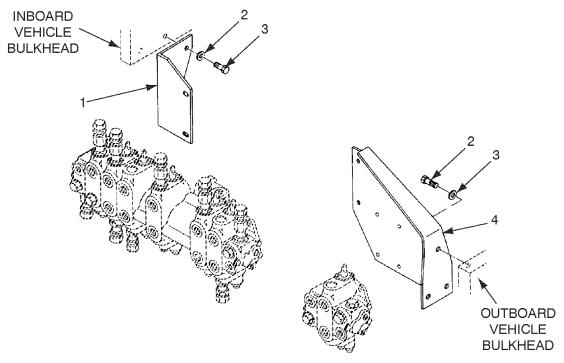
Components to be Removed and/or Replaced - DCV Bank and Suspension Valve Mounting Brackets
